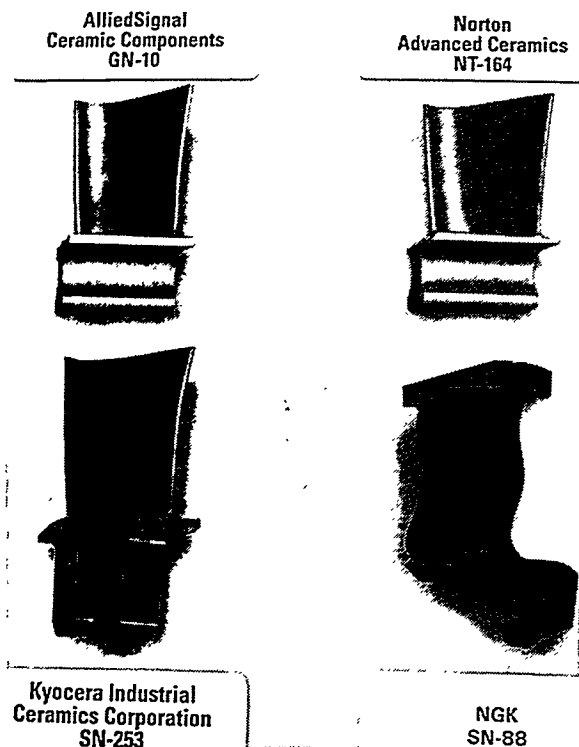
Fabricated Dovetail and Pinned Root Blades and Bowed Nozzle
